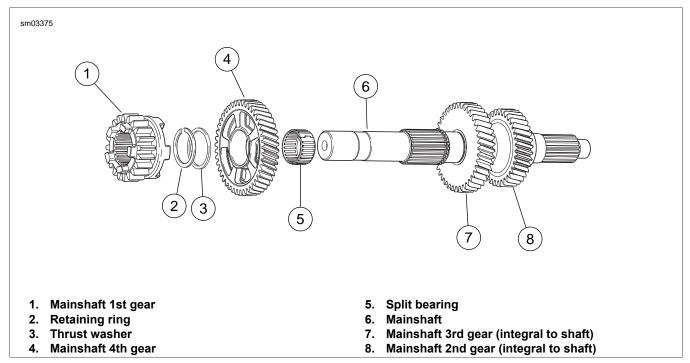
Transmission Mainshaft Assembly Once Removed from Left Crankcase/Disassembly
